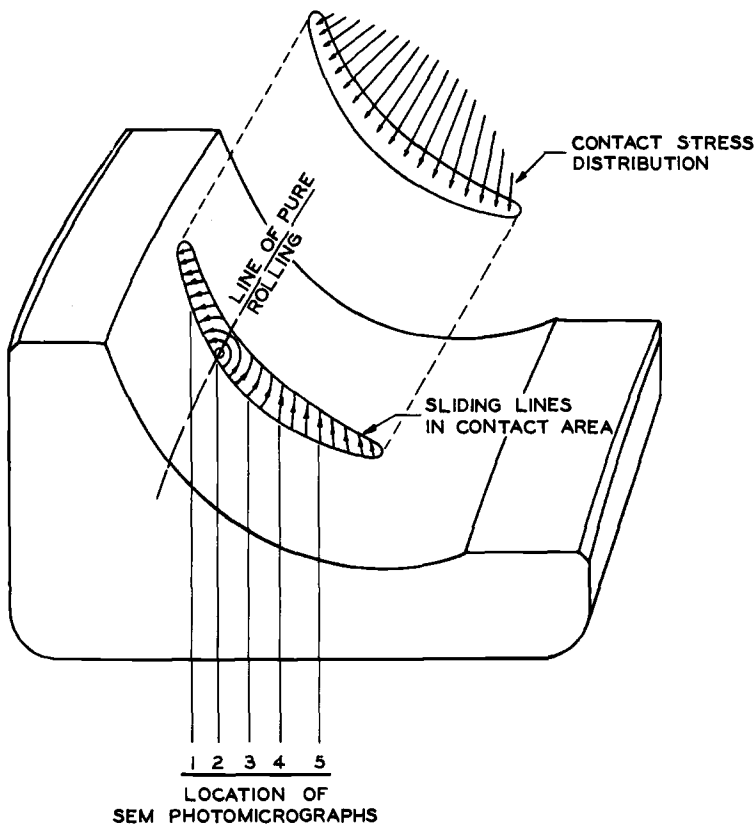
Inner ring contact detail in an angular contact ball bearing.
